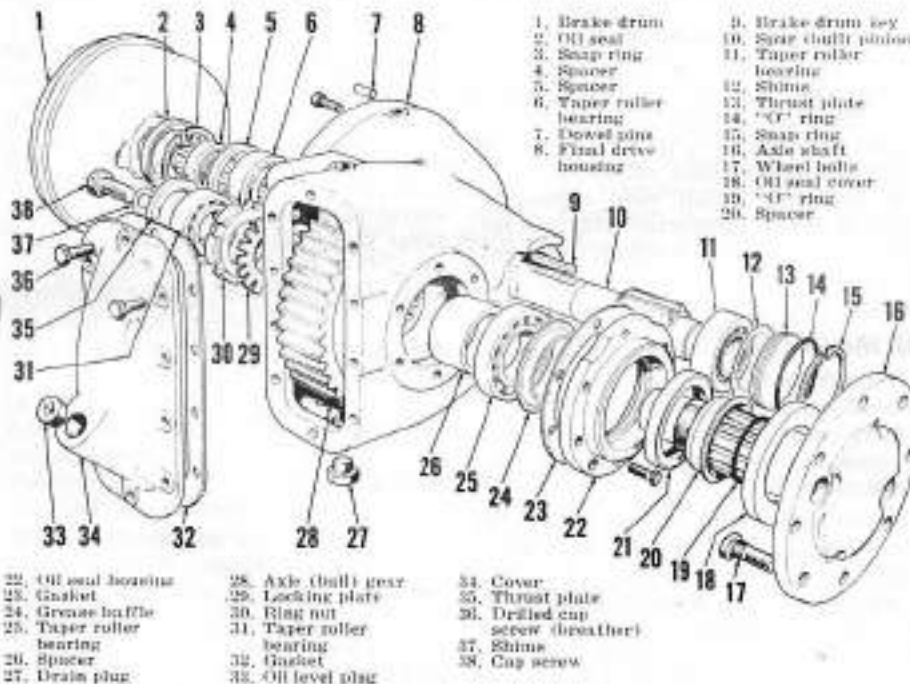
Exploded view of model 1200 final drive assembly. Axle shaft bearings are adjusted by varying shims under cap screw (38) head; refer also to Fig. 126. Thrust plate (35) and taper roller bearing (31) are located in blind bore (except for tapped hole for cap screw) and can be removed after removing axle (16) and axle gear. Remove cap screw (38) and tap thrust plate and bearing cap out with punch.
